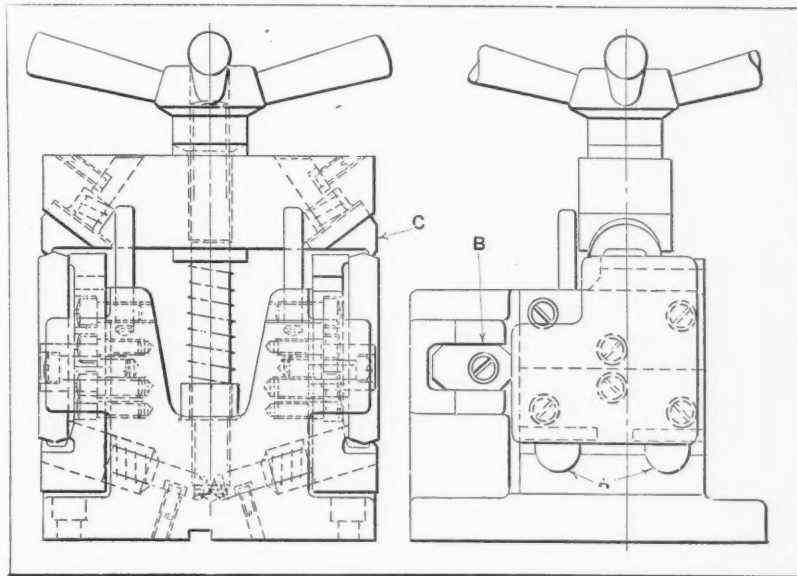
Construction of Fixture Used in the Set-up Shown in Fig. 1
